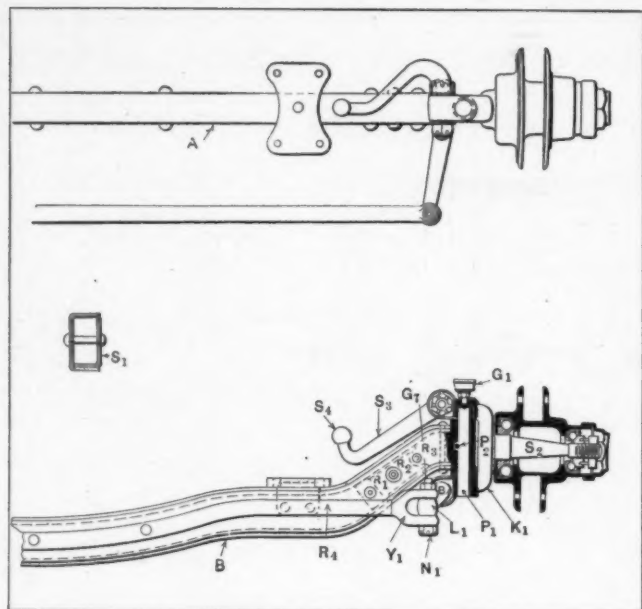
Plan and section of A. O. Smith type of pressed-steel front axle using cup-and-cone ball bearings
